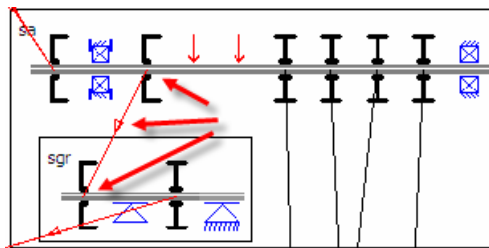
Loose gear connection with clutch connection, bearing - force pair needed to consider gear forces in the supporting shaft
